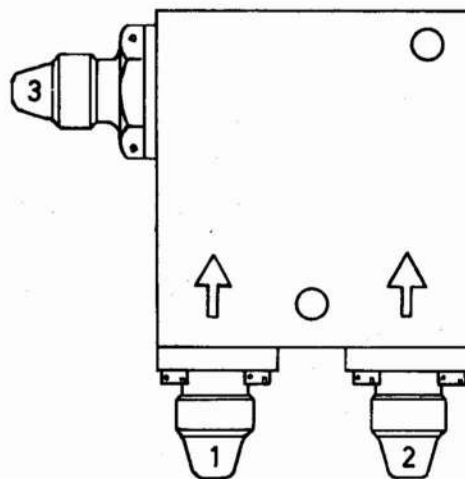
Twin supply check valve, Ref. No. 6D/2266
